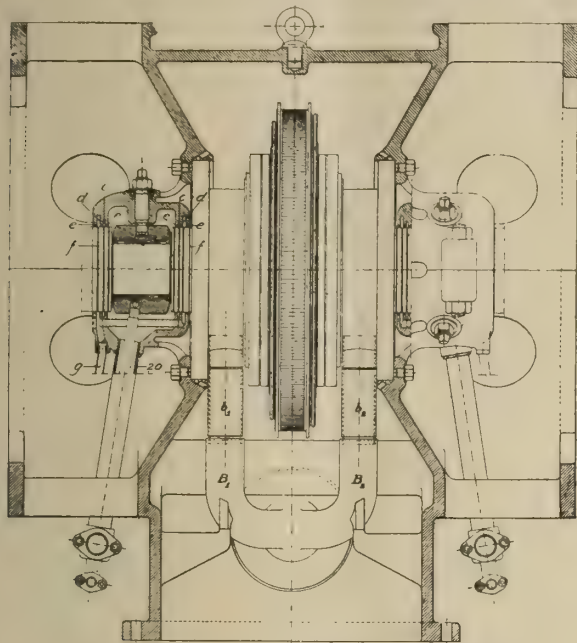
SECTION OF A 1000 KILOWATT TURBINE.
